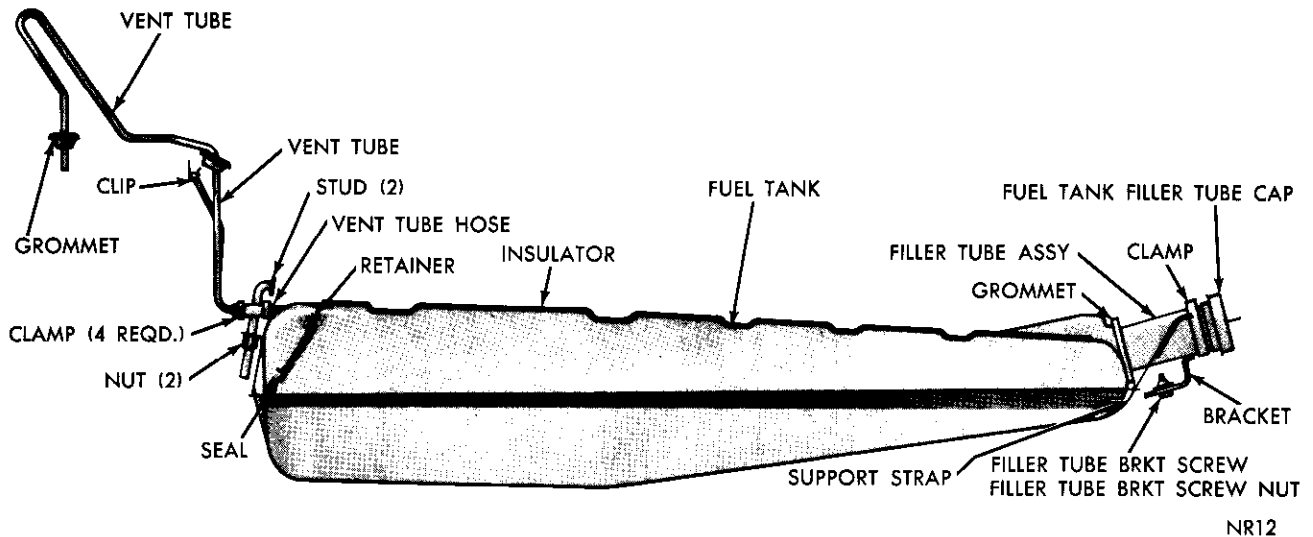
Fuel Tank Assembly (116.5 inch W/B Vehicles) Sedans
